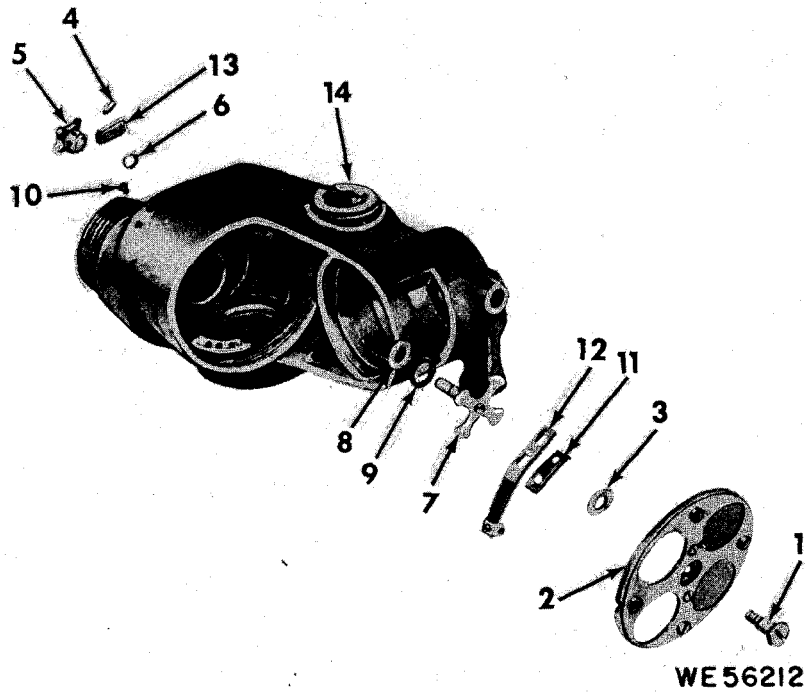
Filter holder assembly 5582519 and right housing 6582848-exploded view.
